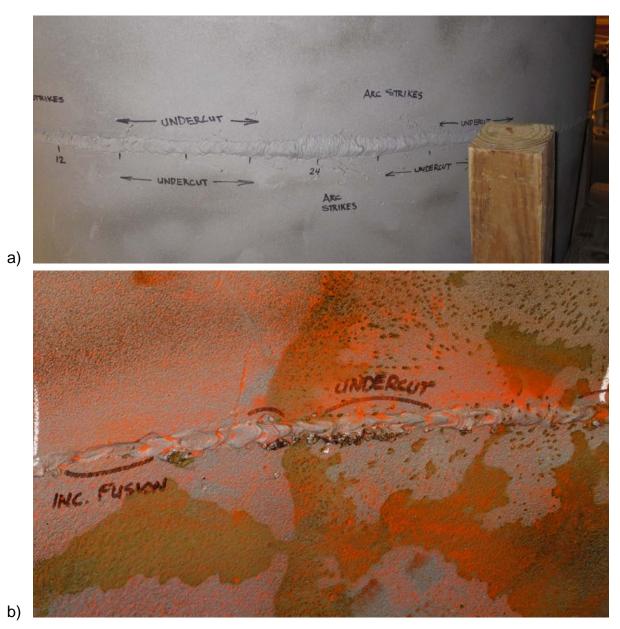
a) Weld imperfections indicated by visual examination on the external surface of girth weld C1; b) Weld imperfections indicated by visual examination on the internal surface of girth weld C2. The photograph was taken after magnetic particle inspection.
